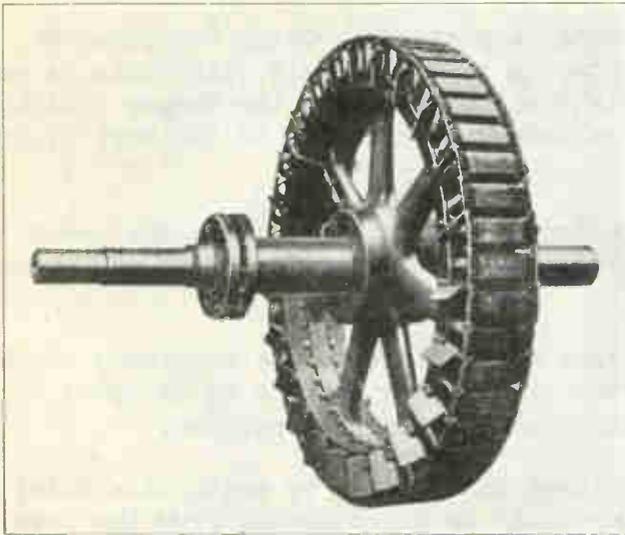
Revolving field or rotor of a large slow-speed synchronous motor. Note the squirrel-cage damper winding attached to the pole faces and also the slip rings through which the D.C. is passed to the revolving field poles.
